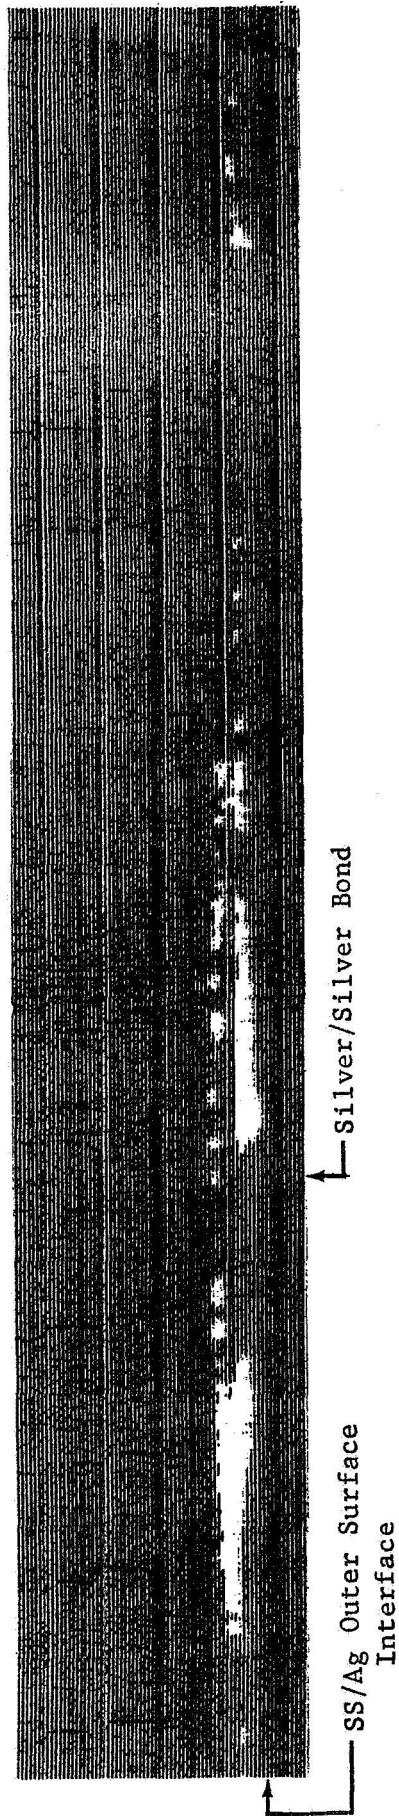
Ultrasonic Inspection Readout of Explosive Welded Joint-5,
